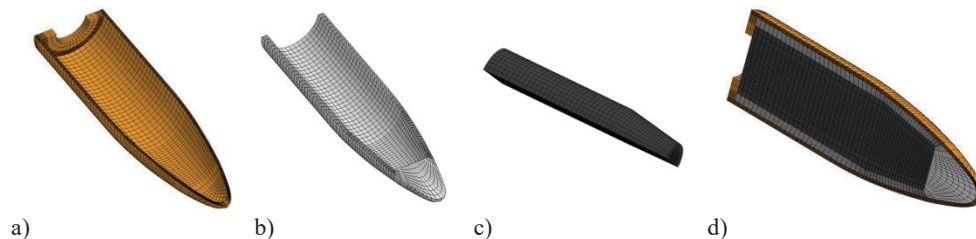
Numerical model of the 7.62 x 39 mm projectile: (a) steel jacket; (b) lead filler; (c) steel core; and (d) assembled projectile.
